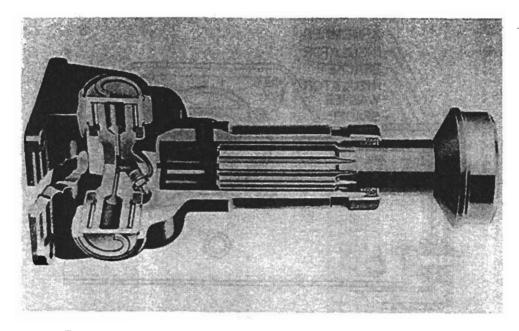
Cutaway View of Spicer Universal Joint. Note Oil Reservoirs in Journal Cross.
